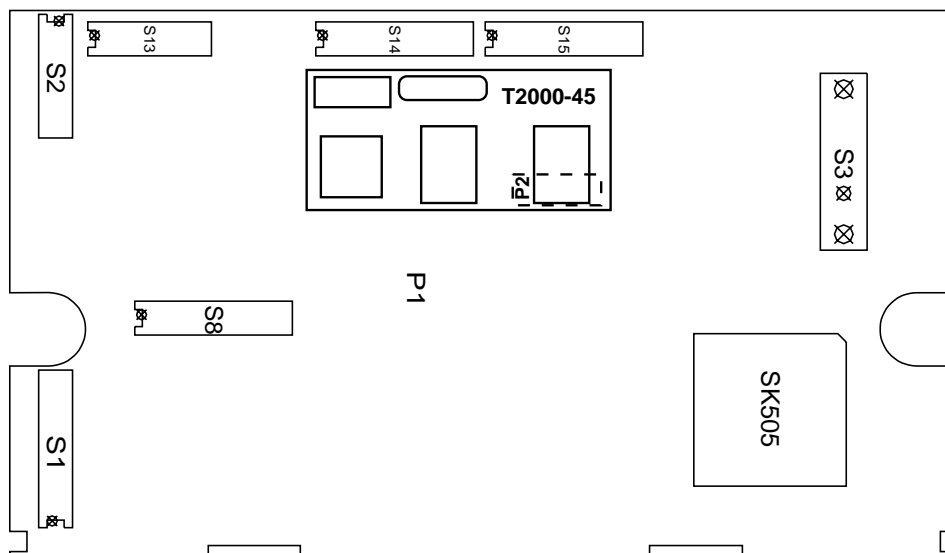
T2000-A450X PCB Mounting (T201X logic PCB shown)
